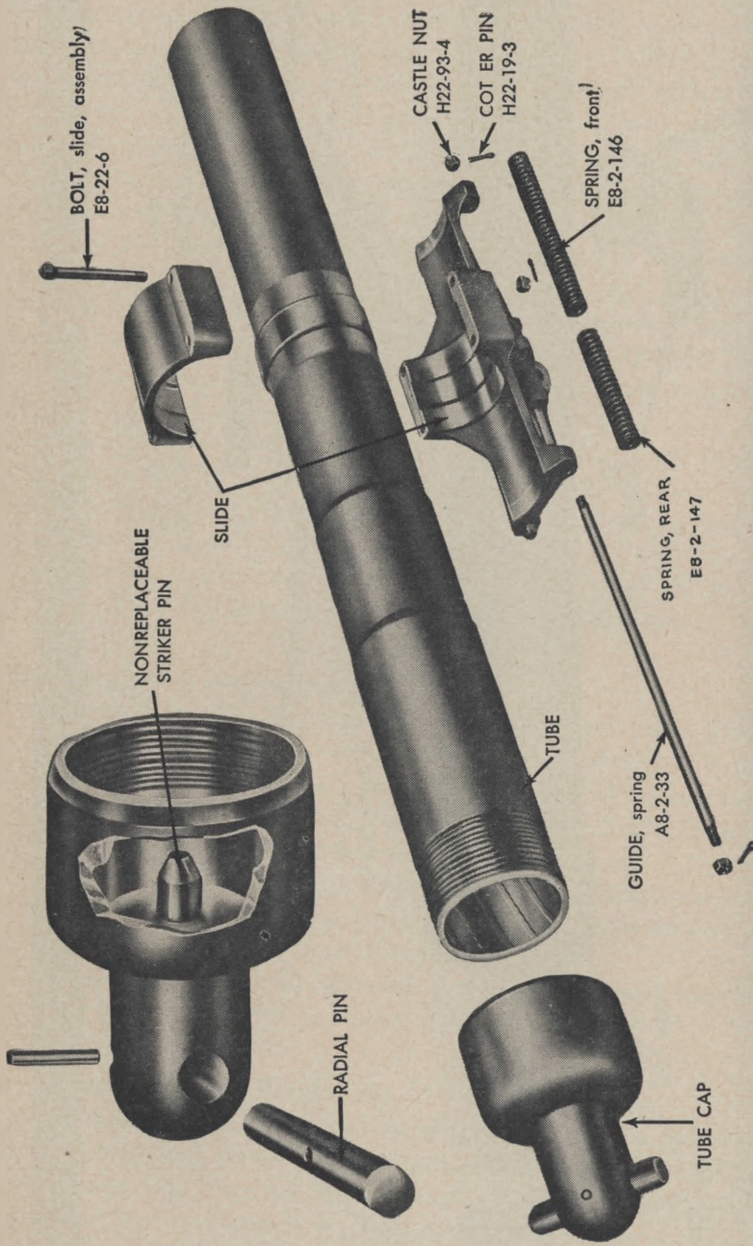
Exploded view of barrel M2 (revised) showing sectioned tube cap.
